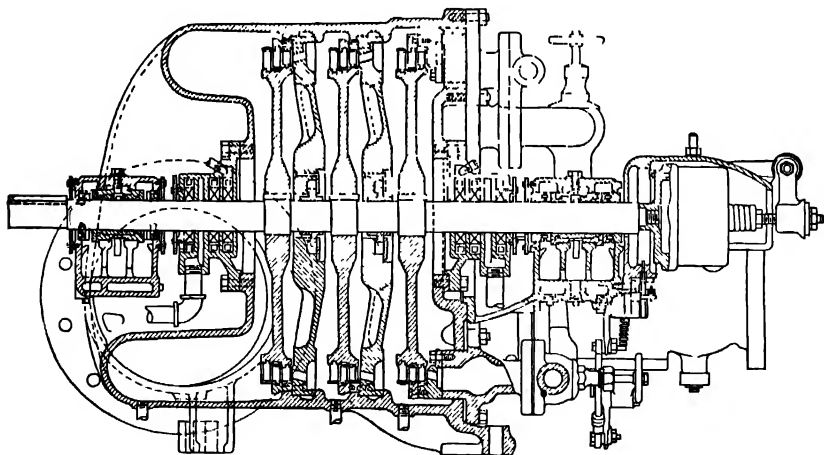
Assembly of Three-stage Curtis Turbine for Mechanical Drive.
